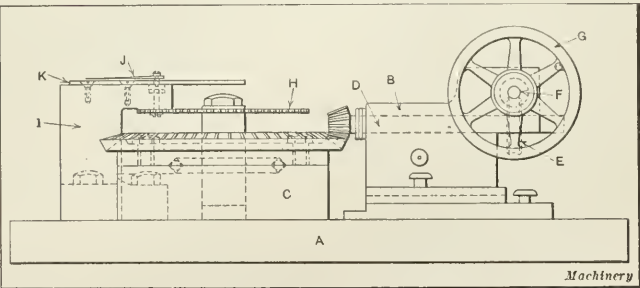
Special Fixture for testing Running Action of Bevel Ring Gear and Pinion
